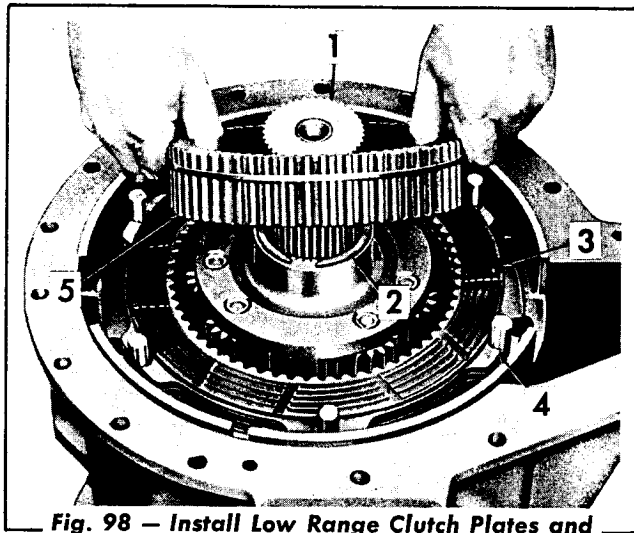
Install Low Range Clutch Plates and Ring Gear
